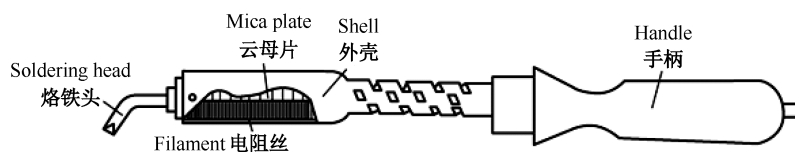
Structure of External Heating Electric Soldering Iron 外热式电烙铁结构
